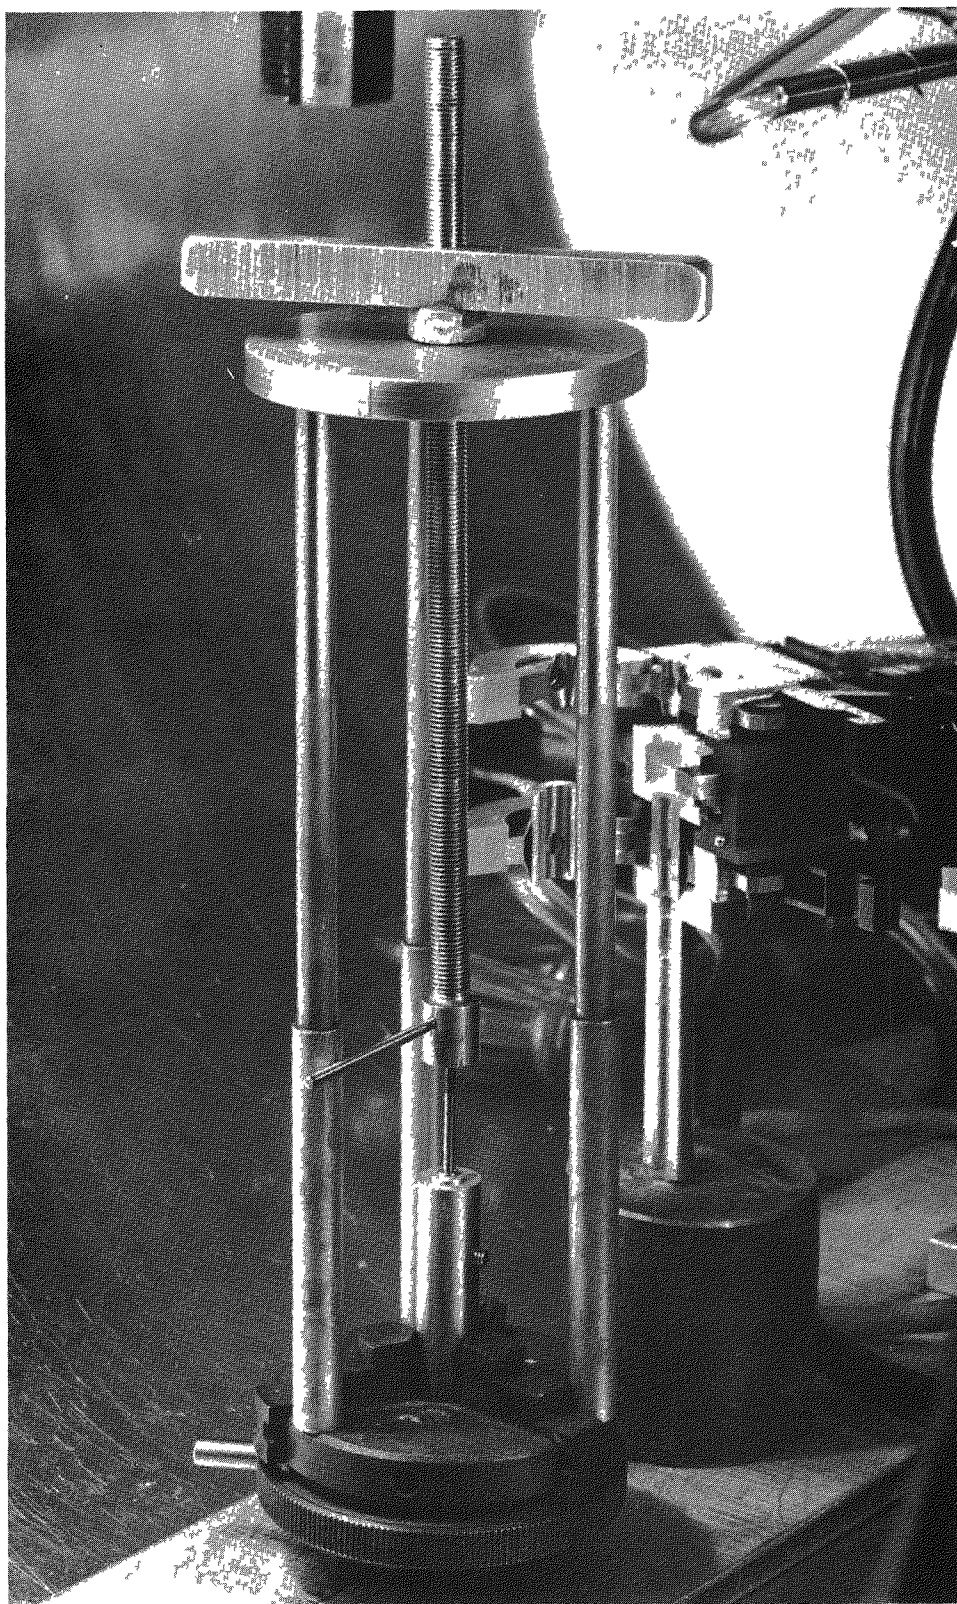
Filler Pin Being Pulled from Fuel-element Preassembly. ANL Neg. No. 104-77-107.
